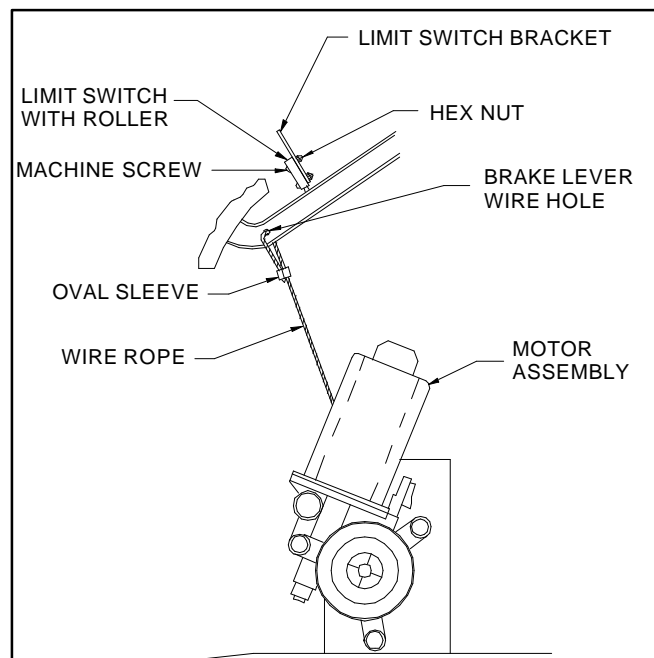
SIDE VIEW OF RIGHT-INSTALLED POWER PARKING BRAKE
